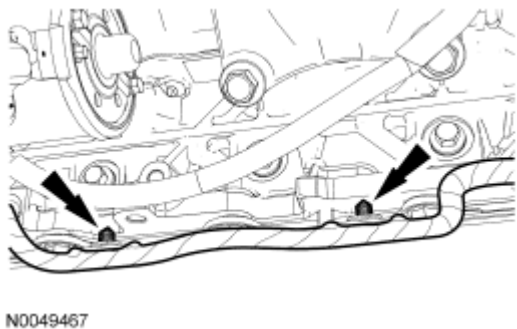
Locating Wiring Harness Pin-Type Retainers From Oil Pan
